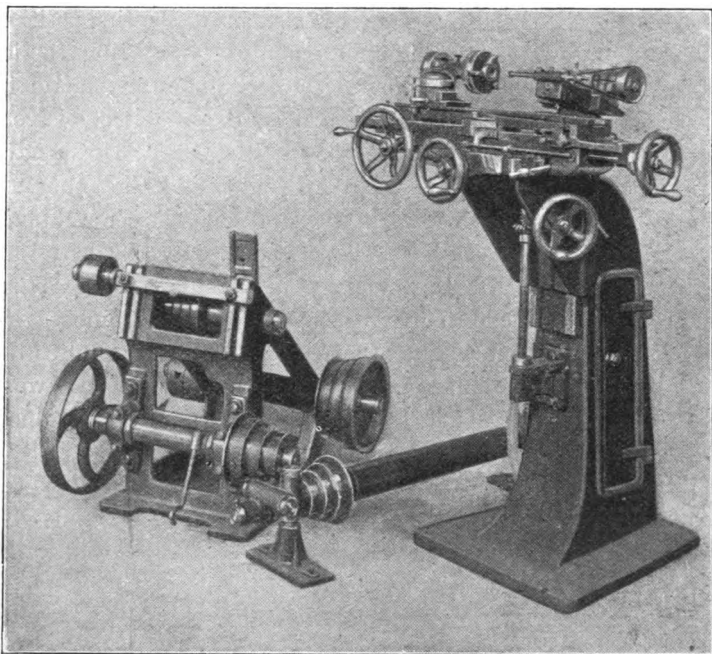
"Guest" Emery Grinding Machine and Countershaft.
